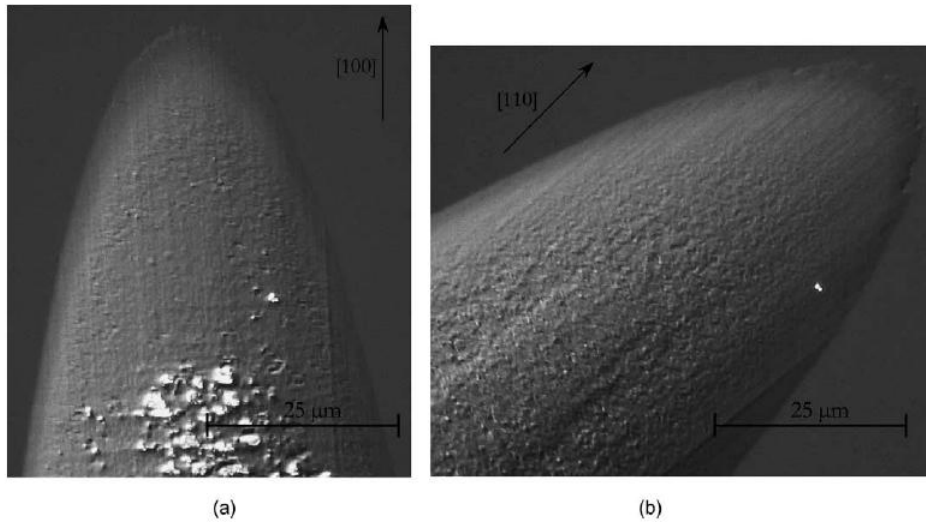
The SEM images from two different cuts. (a) A cut in the [100] direction. (b) A cut in the [110] direction. The pitting caused by brittle fracture removal mechanisms can clearly be seen to be closer to the surface in the [100] direction. [7].
